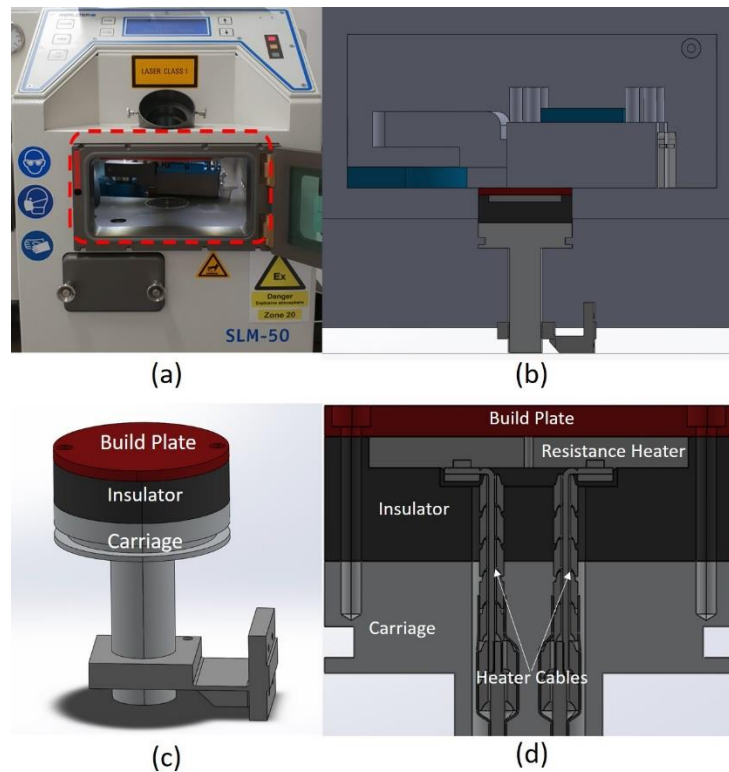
(a) Photograph of build chamber of the Realizer SLM50 printer used for this work. (b) cross-section of CAD showing the build chamber and build plate assembly (c) heated build plate sub-assembly and (d) detailed section view of the heater sub-assembly
